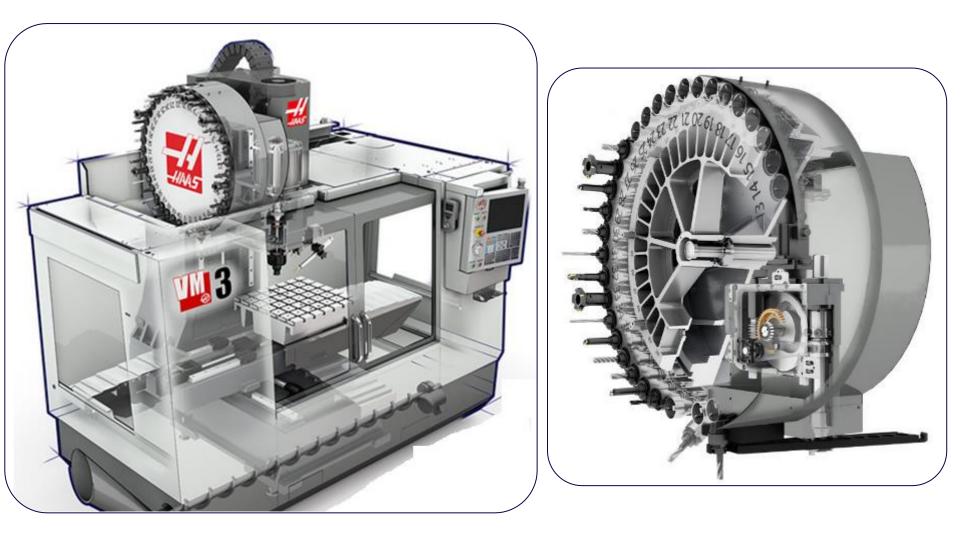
A Vertical CNC machining center employing automatic tool change
